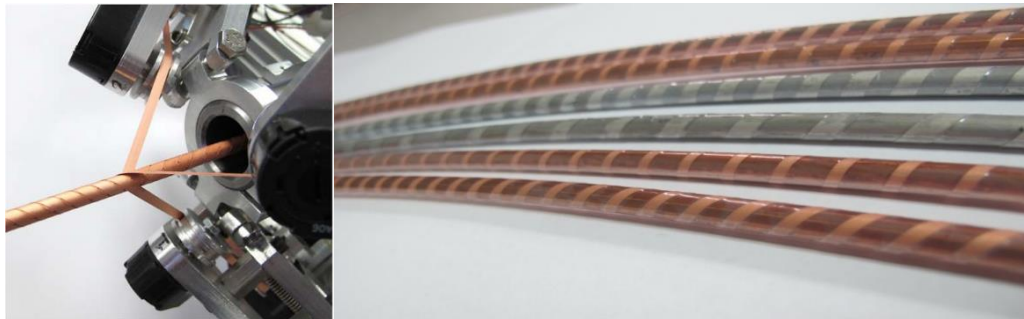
a) CORC cable winding machine [126] b) Simple superconducting CORC cable
